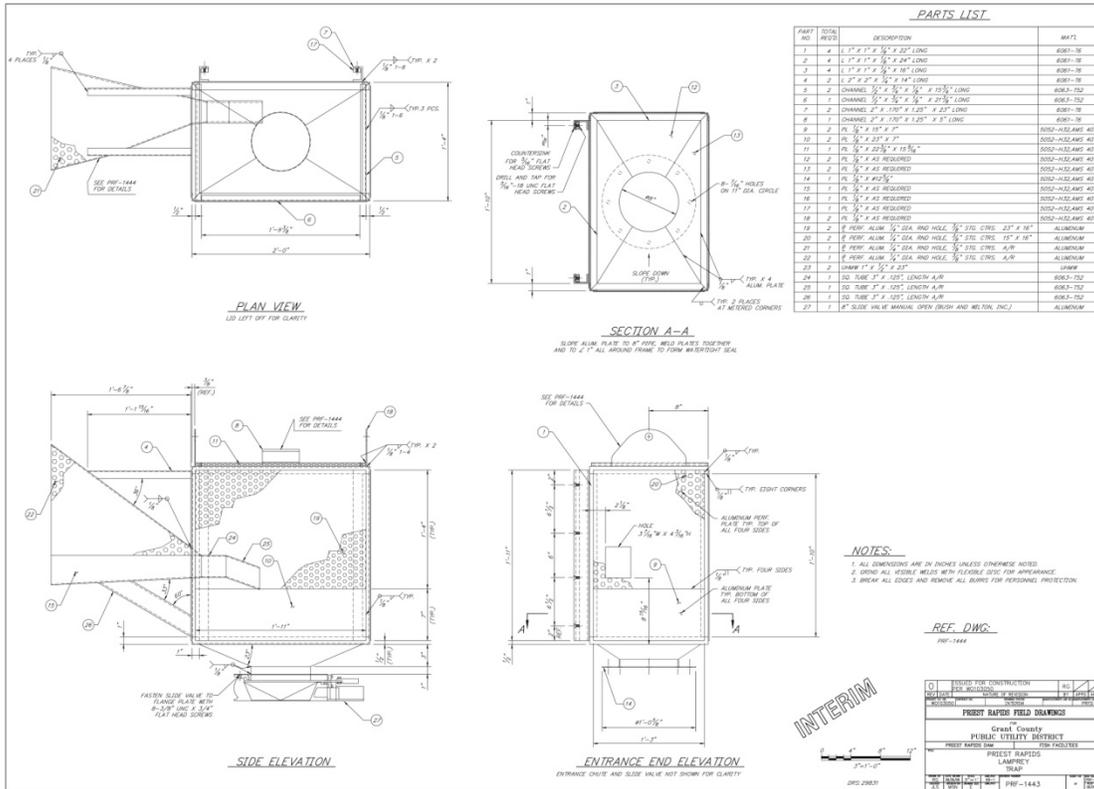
Proposed lamprey trap to be used in the Priest Rapids Dam fishways.
